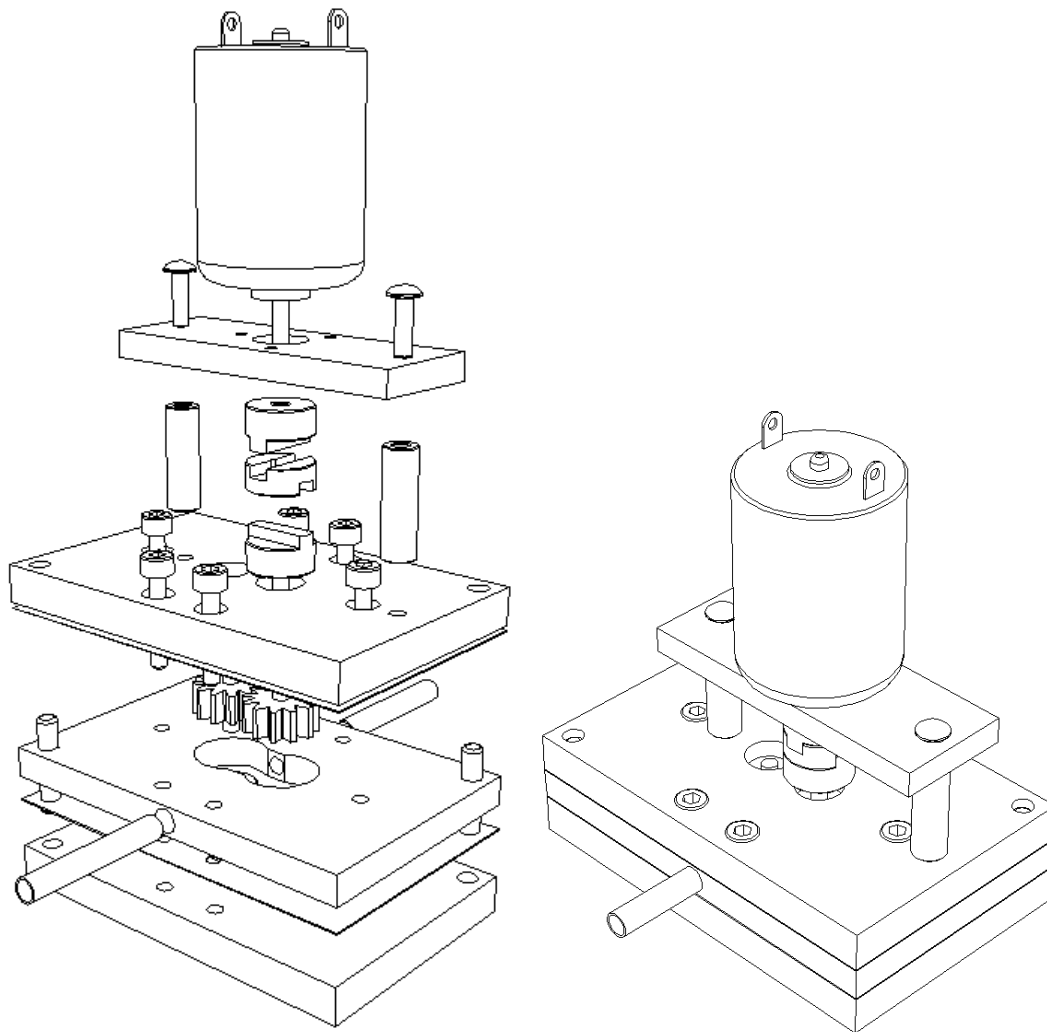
Isometric views of the small gear pump used in the SPARCLE instrument.
